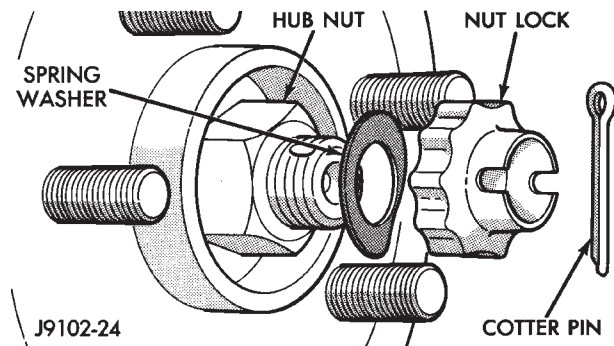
Cotter Pin, Nut Lock & Spring Washer Removal
